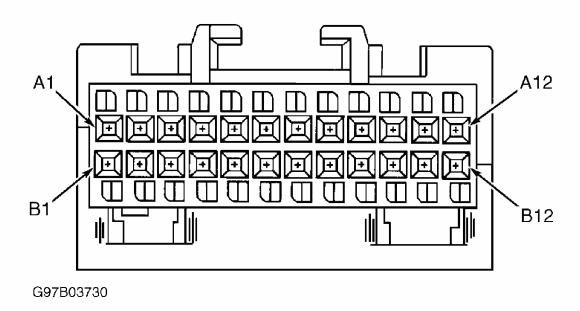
Identifying RTD Control Module Connector C1 (Gray - 24-Pin) Courtesy of GENERAL MOTORS CORP.
